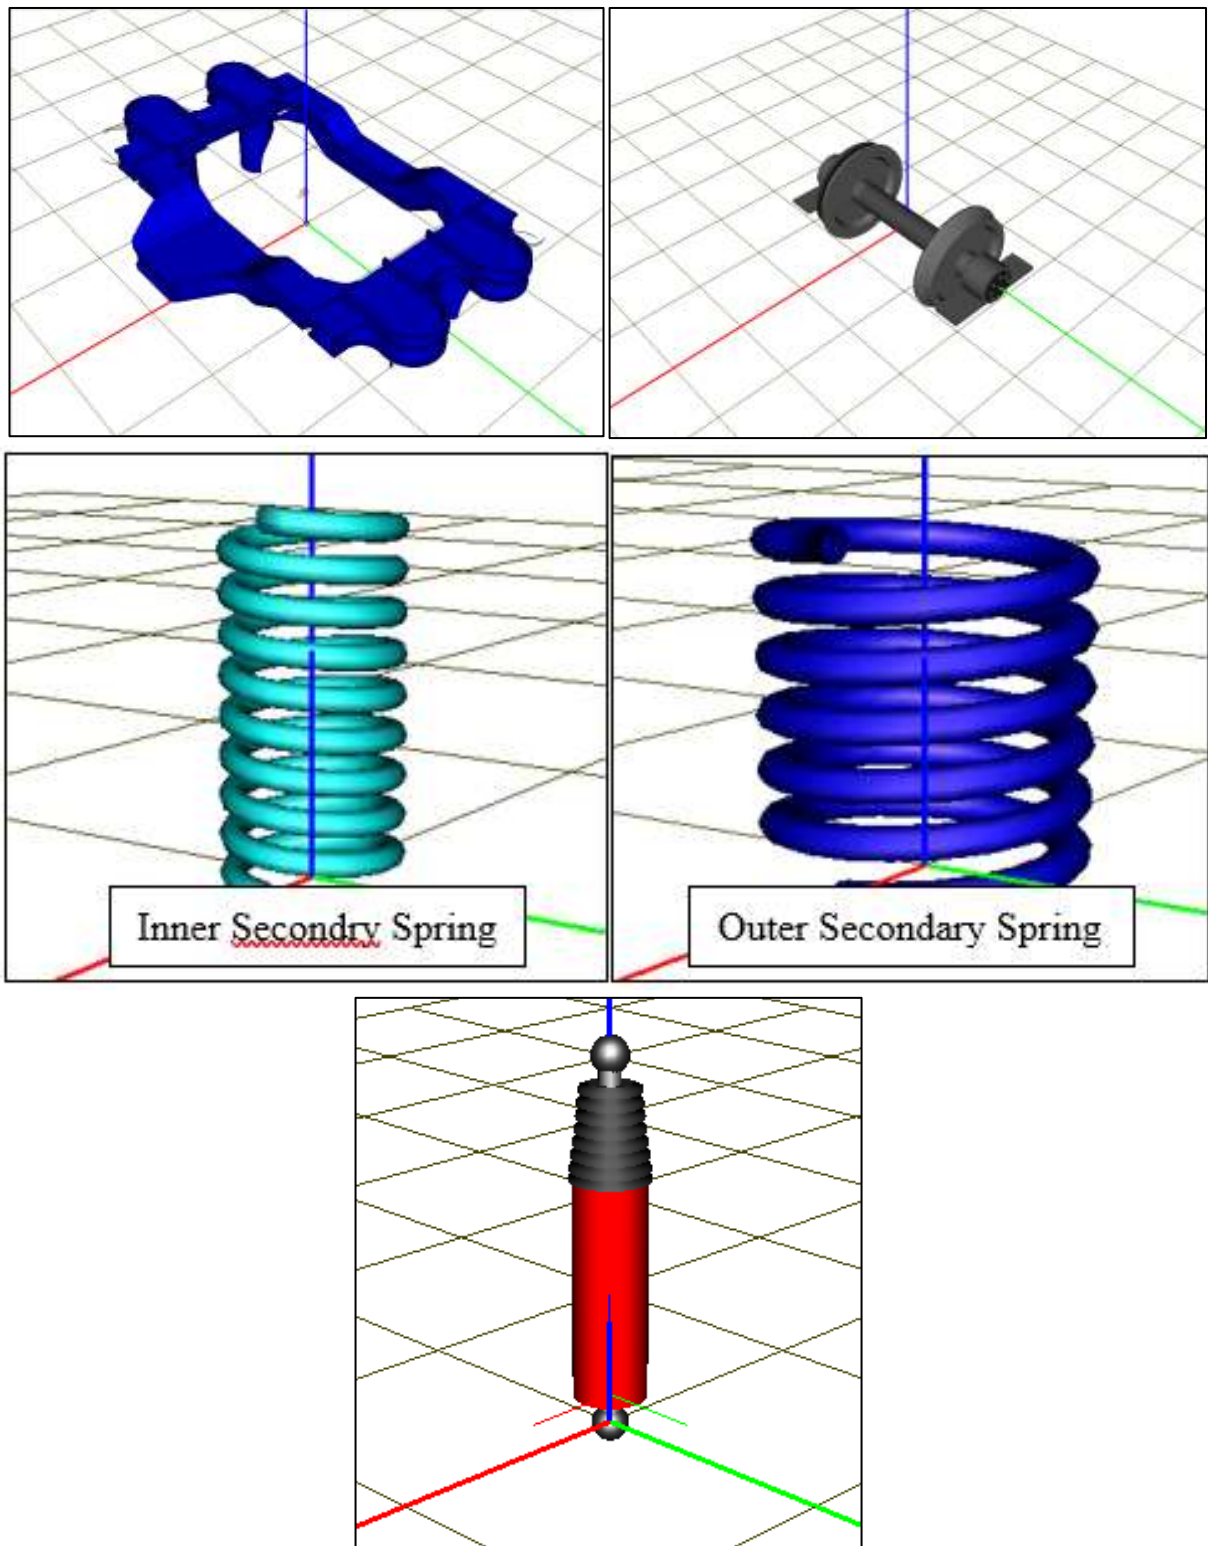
(a) Bogie Frame Design (b) Wheelset Design (c) Inner Secondary Spring (d) Outer Secondary Spring (e) Damper
